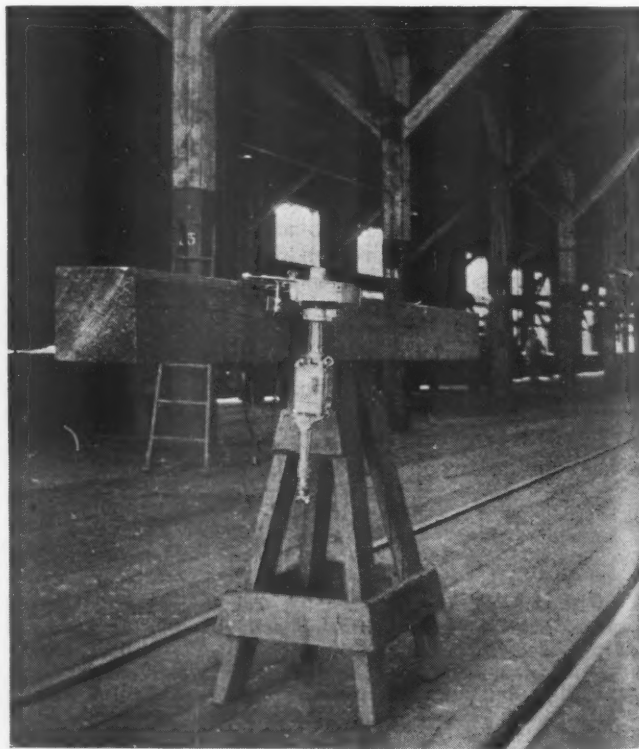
Method of cutting out the crevice and side sills at the upper edge of the sills on refrigerator cars by the use of ordinary air motor grinding machine with wheel removed and a dado head mounted in its place
